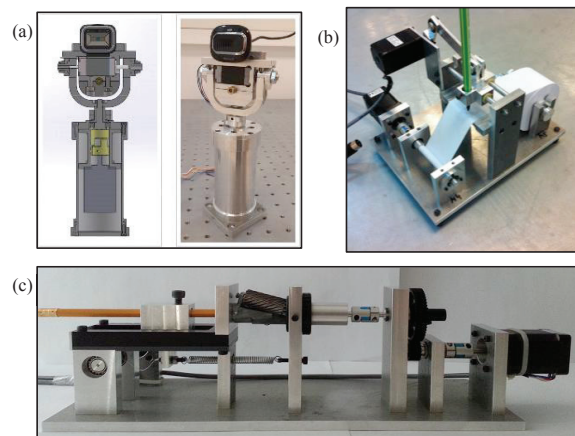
(a) Two DOF gimbal (b) Sine-drawing mechanism (c) Pencil sharpener
